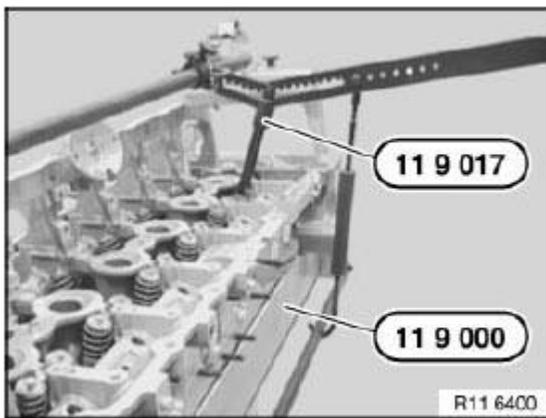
Identifying Special Tools (11 9 000 And 11 9 017)
